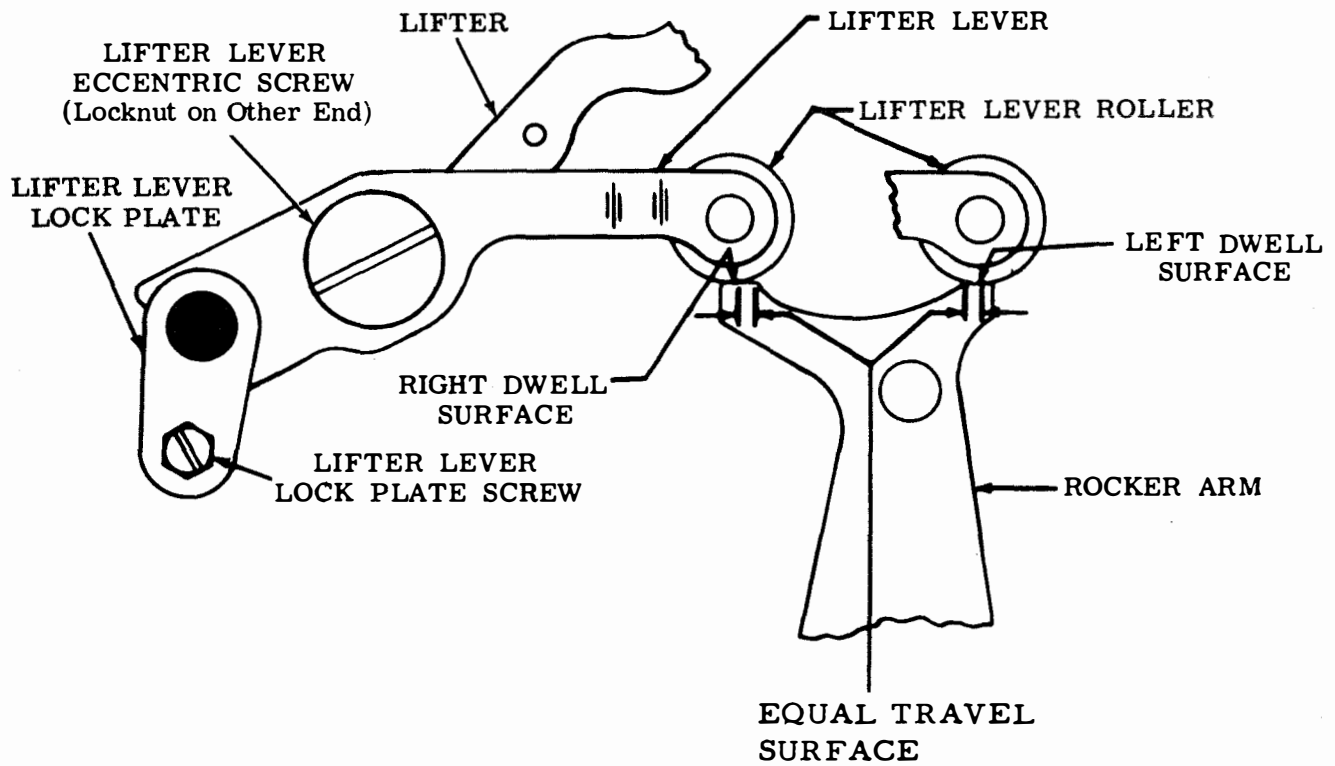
Cam Follower Roller Arm Position, Rear View
